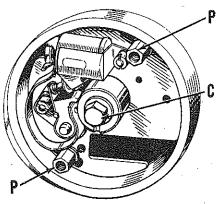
The ignition cam is located at right end of the engine camshaft on later models. Refer to text for adjustment. Make certain that center screw (C) is tight.
